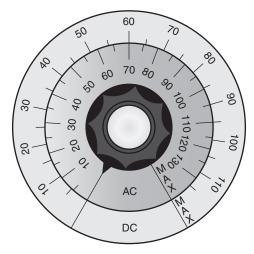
Typical dial on an AC-DC transformer rectifier welder.
